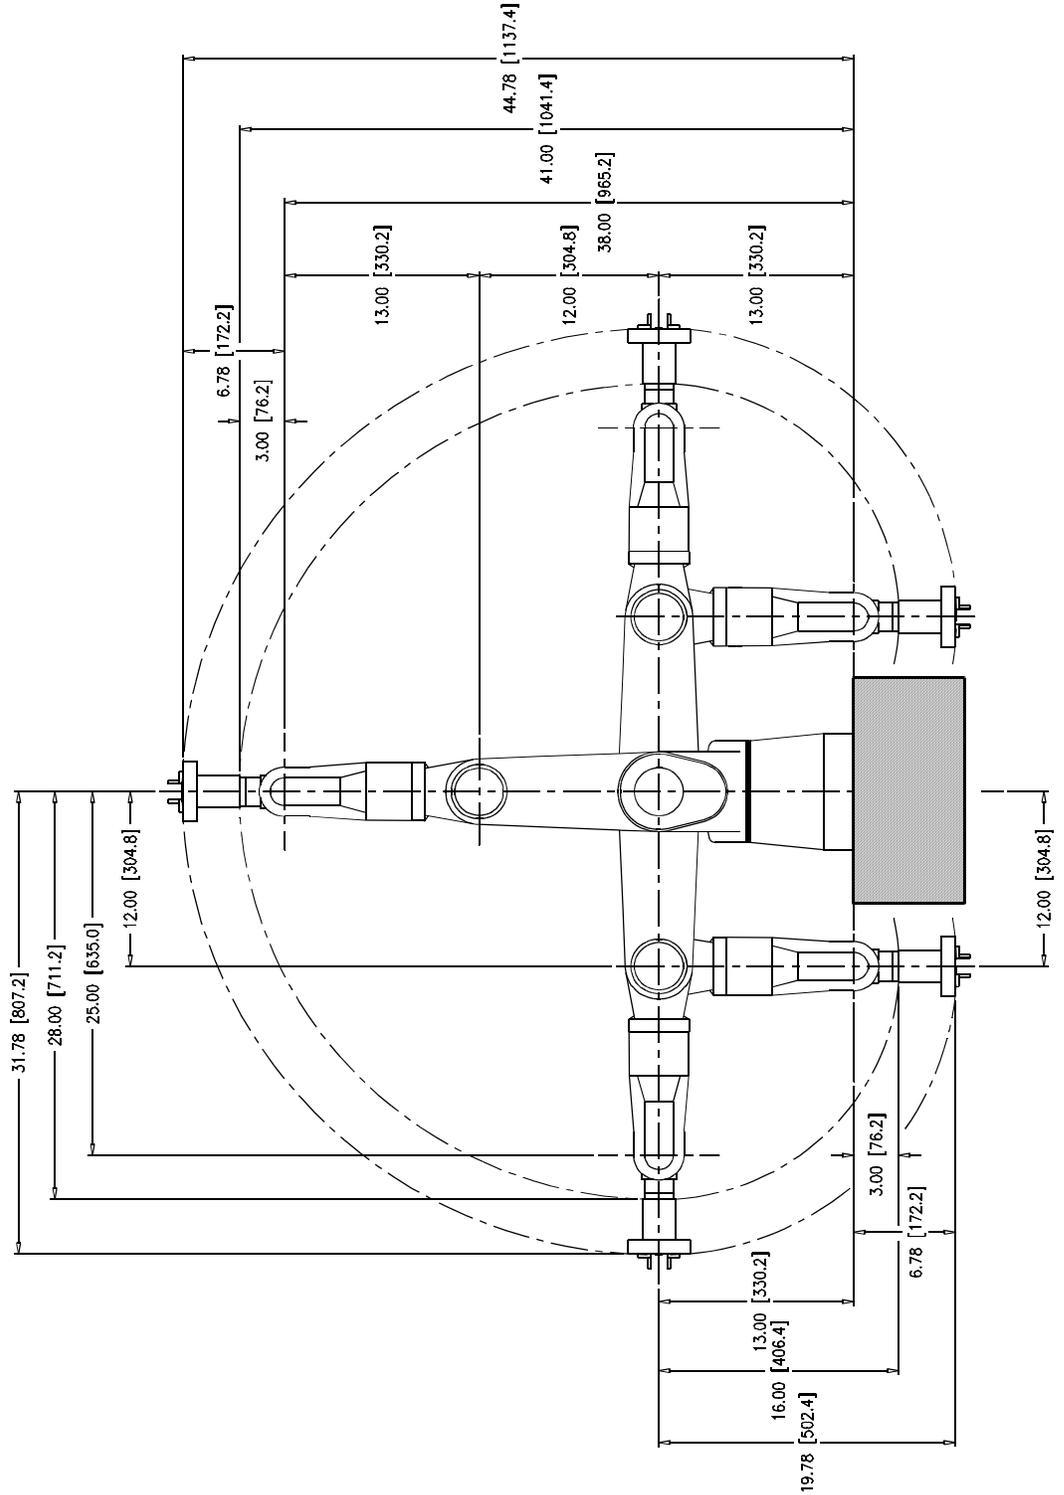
The maximum reach of the A465 arm horizontally from the waist and shoulder axes, and vertically above and below the base/mounting platform level. Dimensions to the tool flange and to the servo gripper finger platform are also shown.
